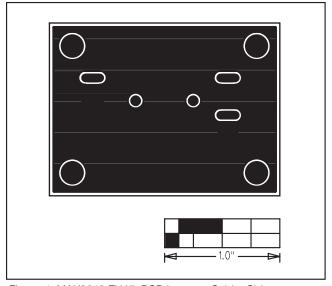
MAX9610 EV Kit PCB Layout—Solder Side
